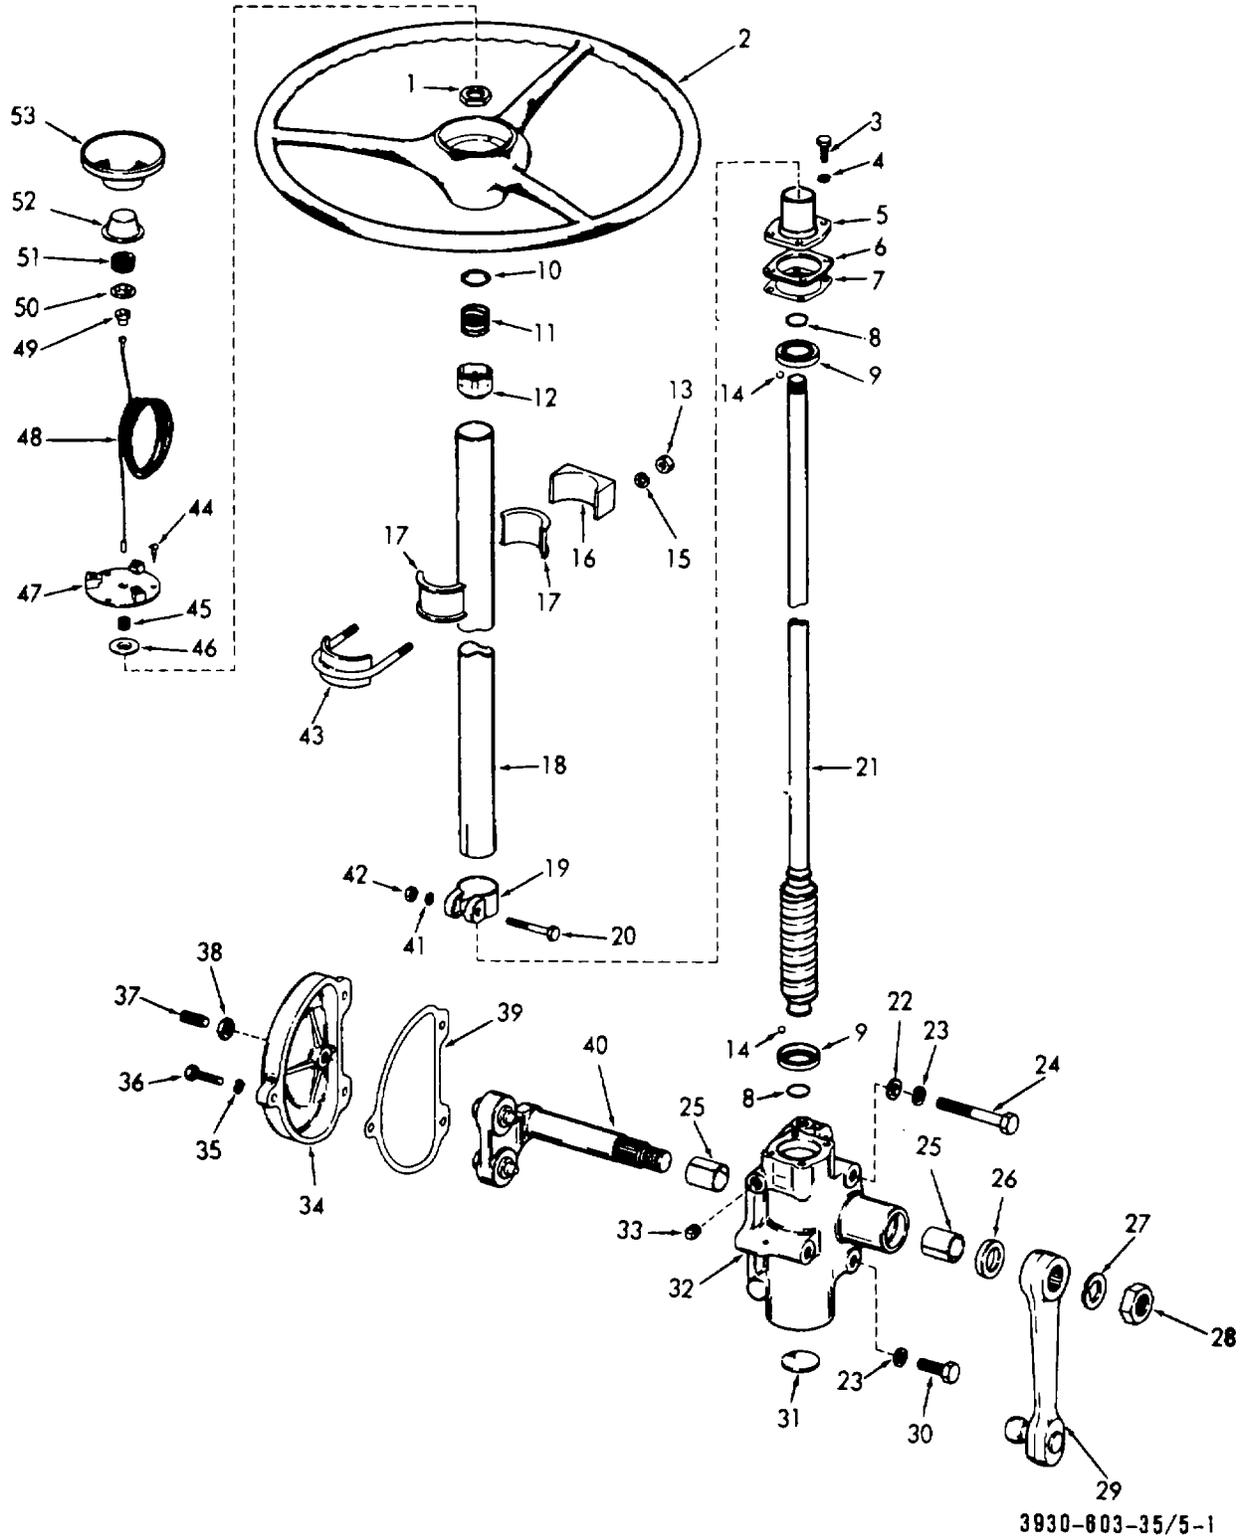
Steering gear assembly, removal, disassembly, reassembly, and installation.
